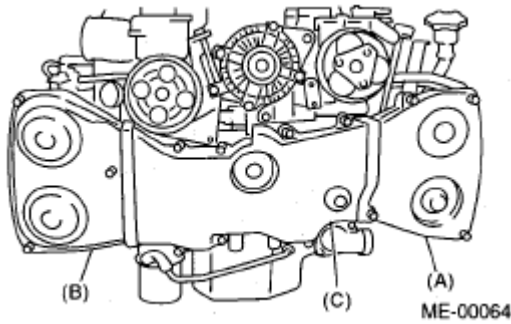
Identifying Timing Belt Covers And Front Timing Belt Cover
